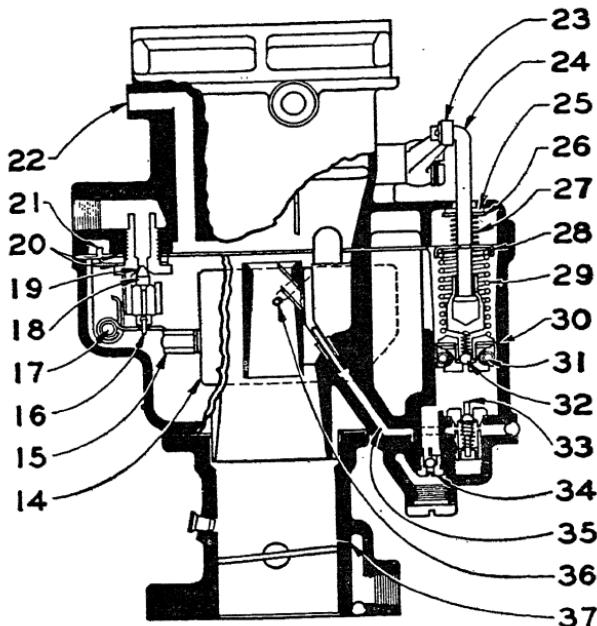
Buick-Stromberg Carburetor Showing Accelerator Well and Pump
